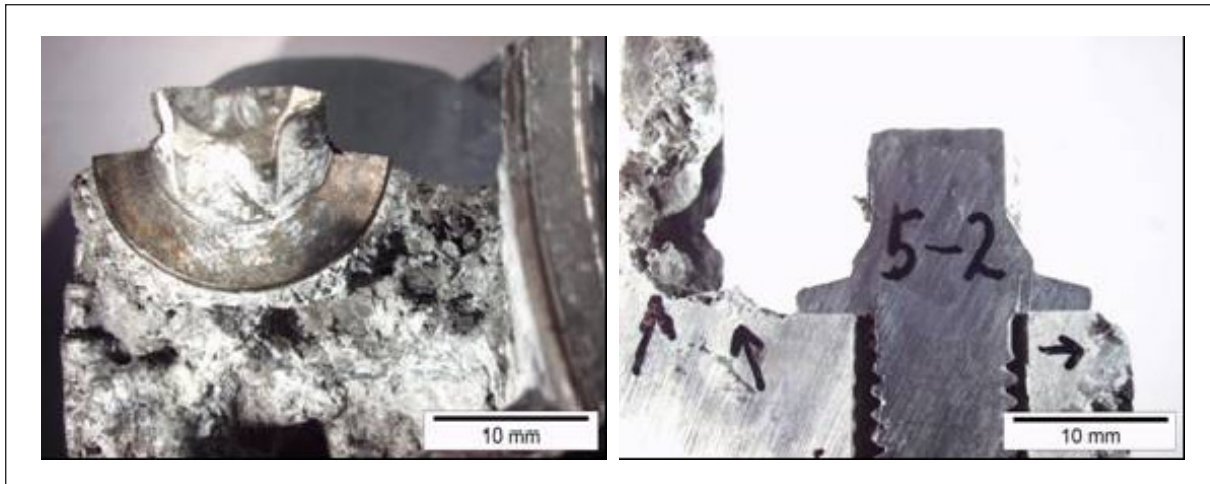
Side view and longitudinal cut of 10.9 steel bolt, zinc flake coated and sealed after 720 hours salt spray test
